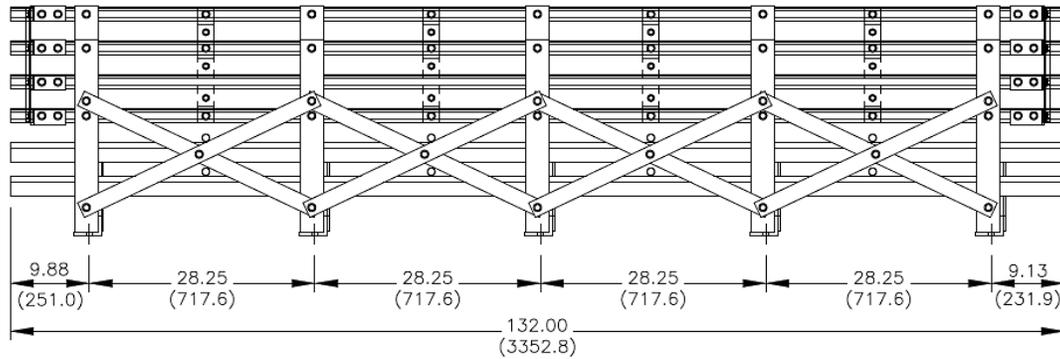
Side-to-side elevation view of the 2-step 5-frame battery rack.
